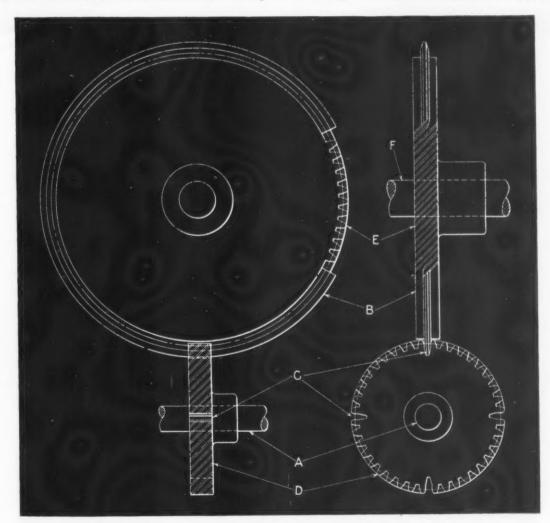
Modified Helical Gears for Indexing Shaft A One-fourth of a Revolution during One Revolution of Driving Shaft F
